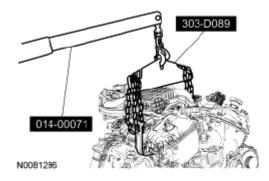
Identifying Heavy Duty Floor Crane And Spreader Bar Courtesy of FORD MOTOR CO.
